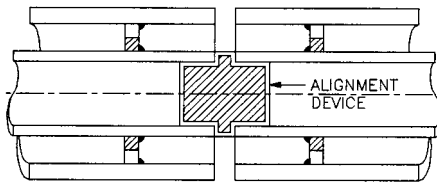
Check the alignment of the primary pipe after planing.
